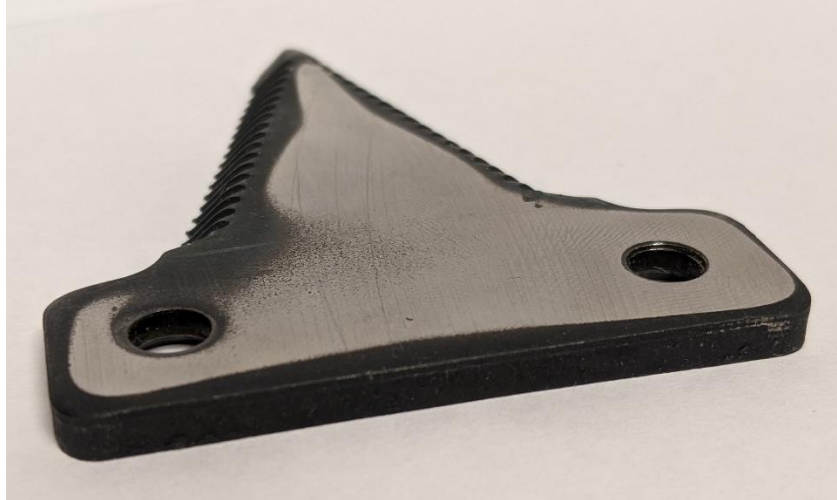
Blanking witness marks on outside edge of original half-feed combine harvester blade
